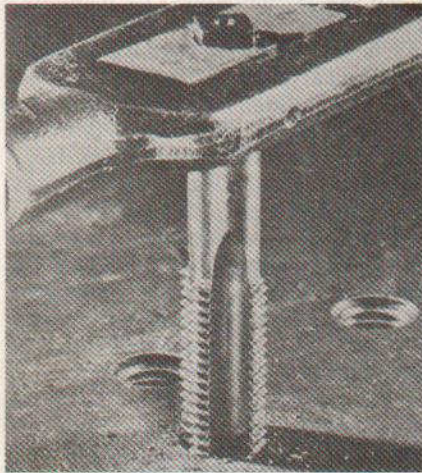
Special drill taps are provided in thread repair kit for threading drilled hole to correct size for outside of thread insert. A standard tap cannot be used.
